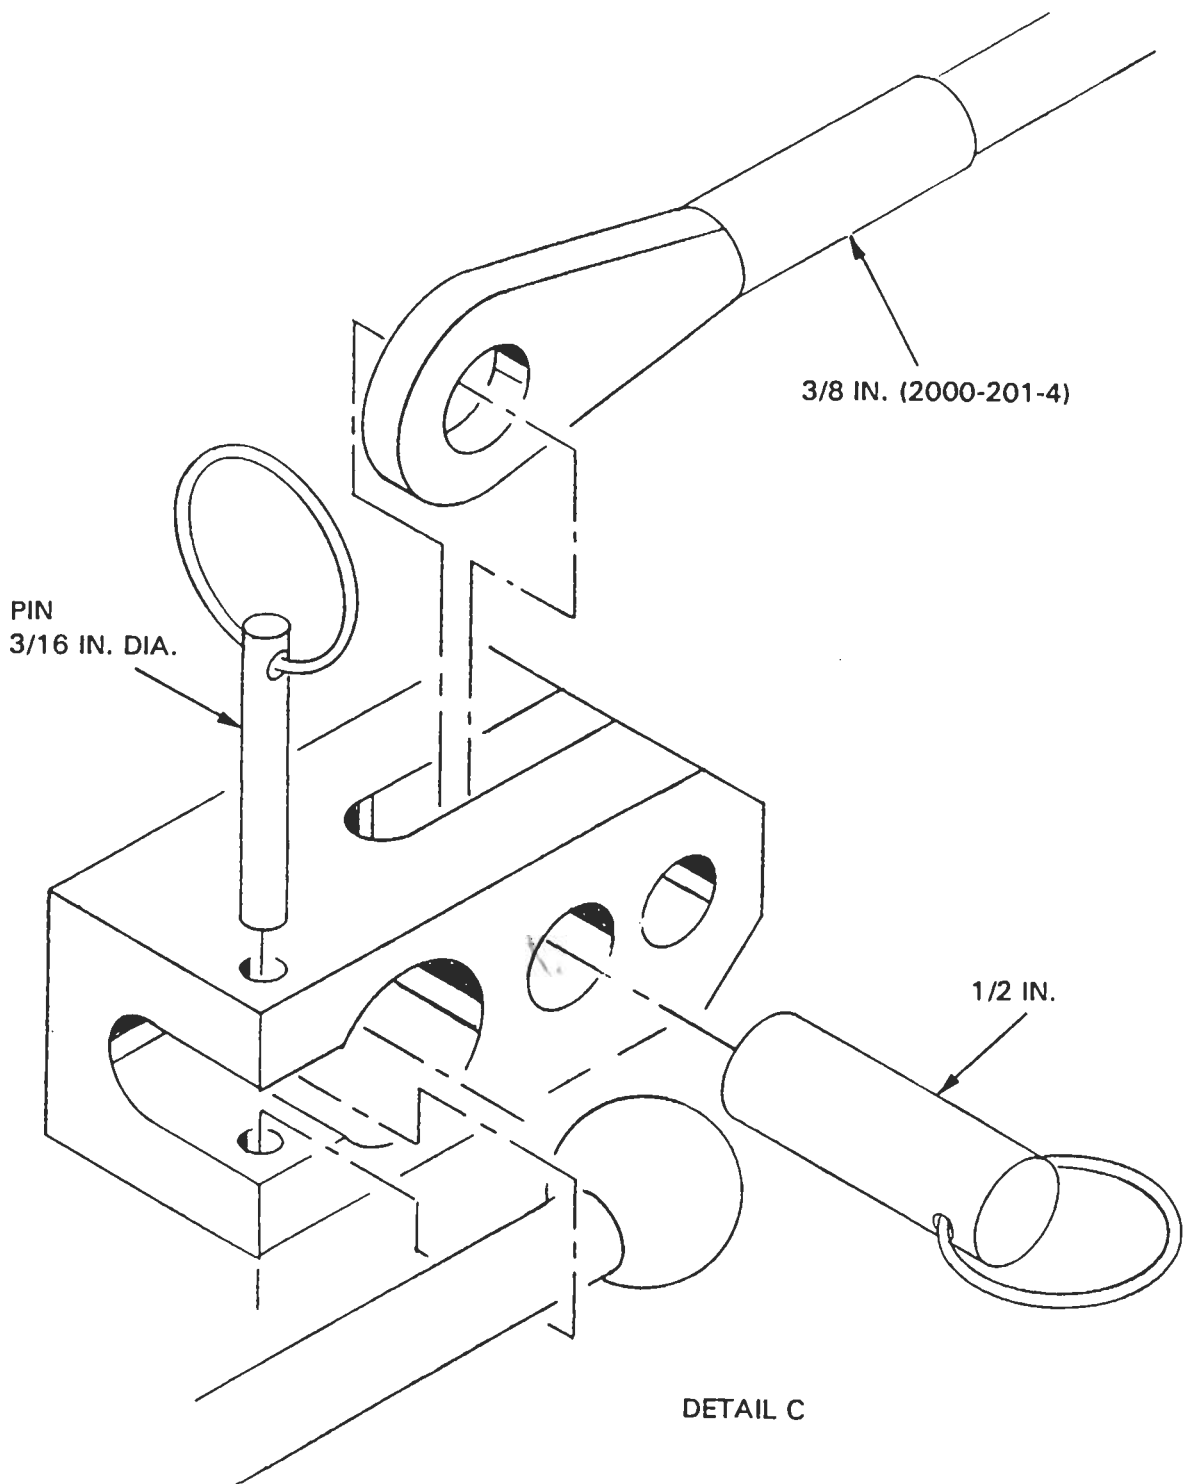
Force Test Setup for Tension (Sheet 3)
